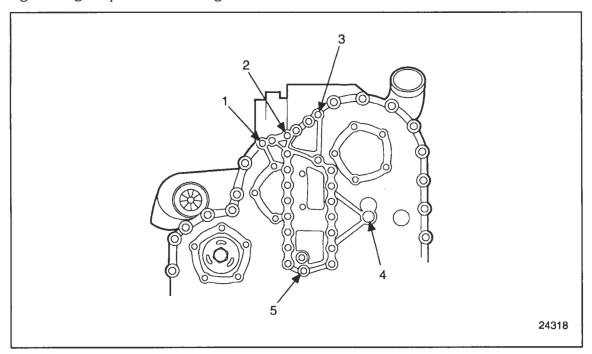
Camshaft Drive Gear Access Cover Bolt Torque Sequence
